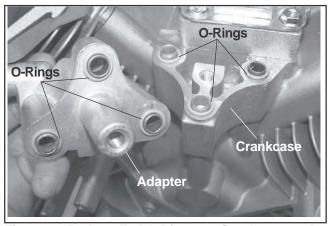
Installed O-Rings on Crankcase and Oil Filter Adapter.
